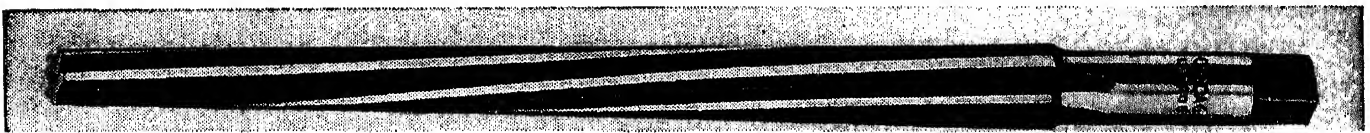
A straight flute taper pin reamer. (Courtesy Chicago-Latrobe Twist Drill Works.)
